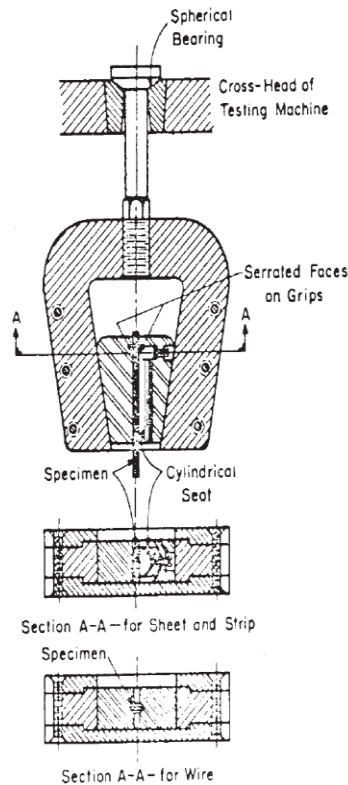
Gripping Devices for Sheet and Wire Specimens
